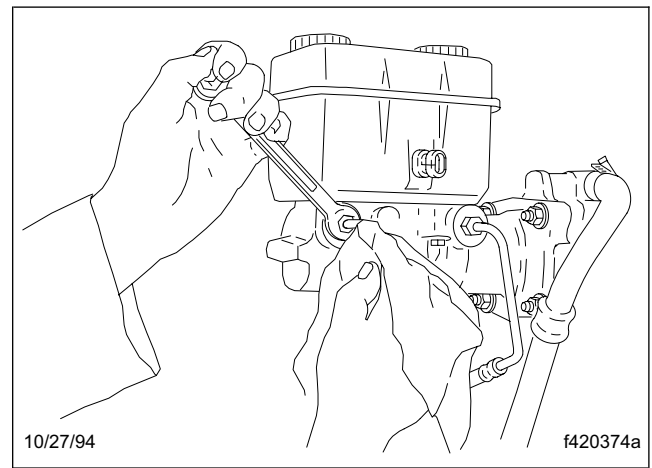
, Loosen the Fitting at the Rear Outlet Port
